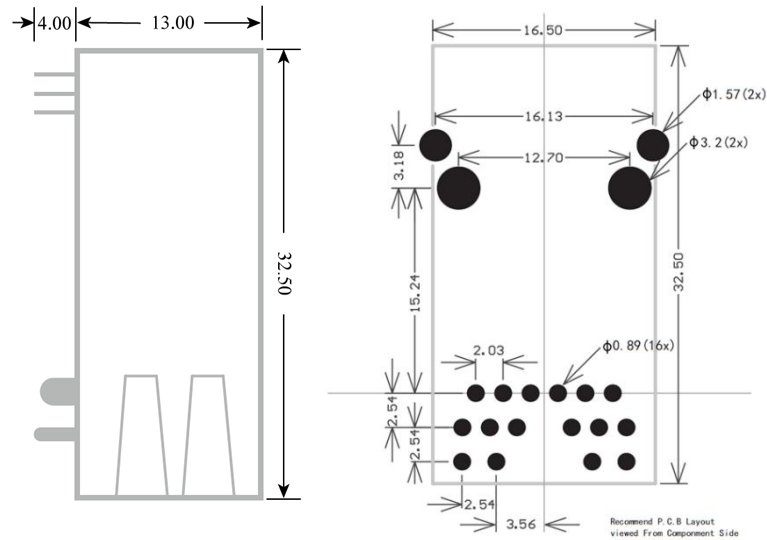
Mechanical dimension diagram of WIZ-IP32
